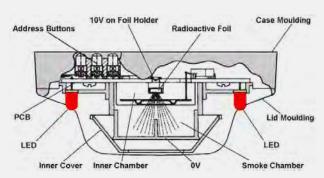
Sectional View – Discovery Ionisation Smoke Chambe
